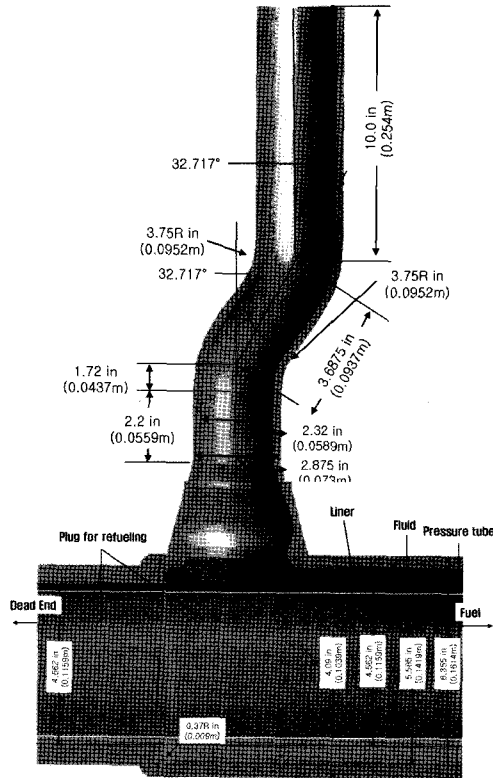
Geometry and Dimensions of a Typical Feeder Pipe Connected to Pressure Tube
